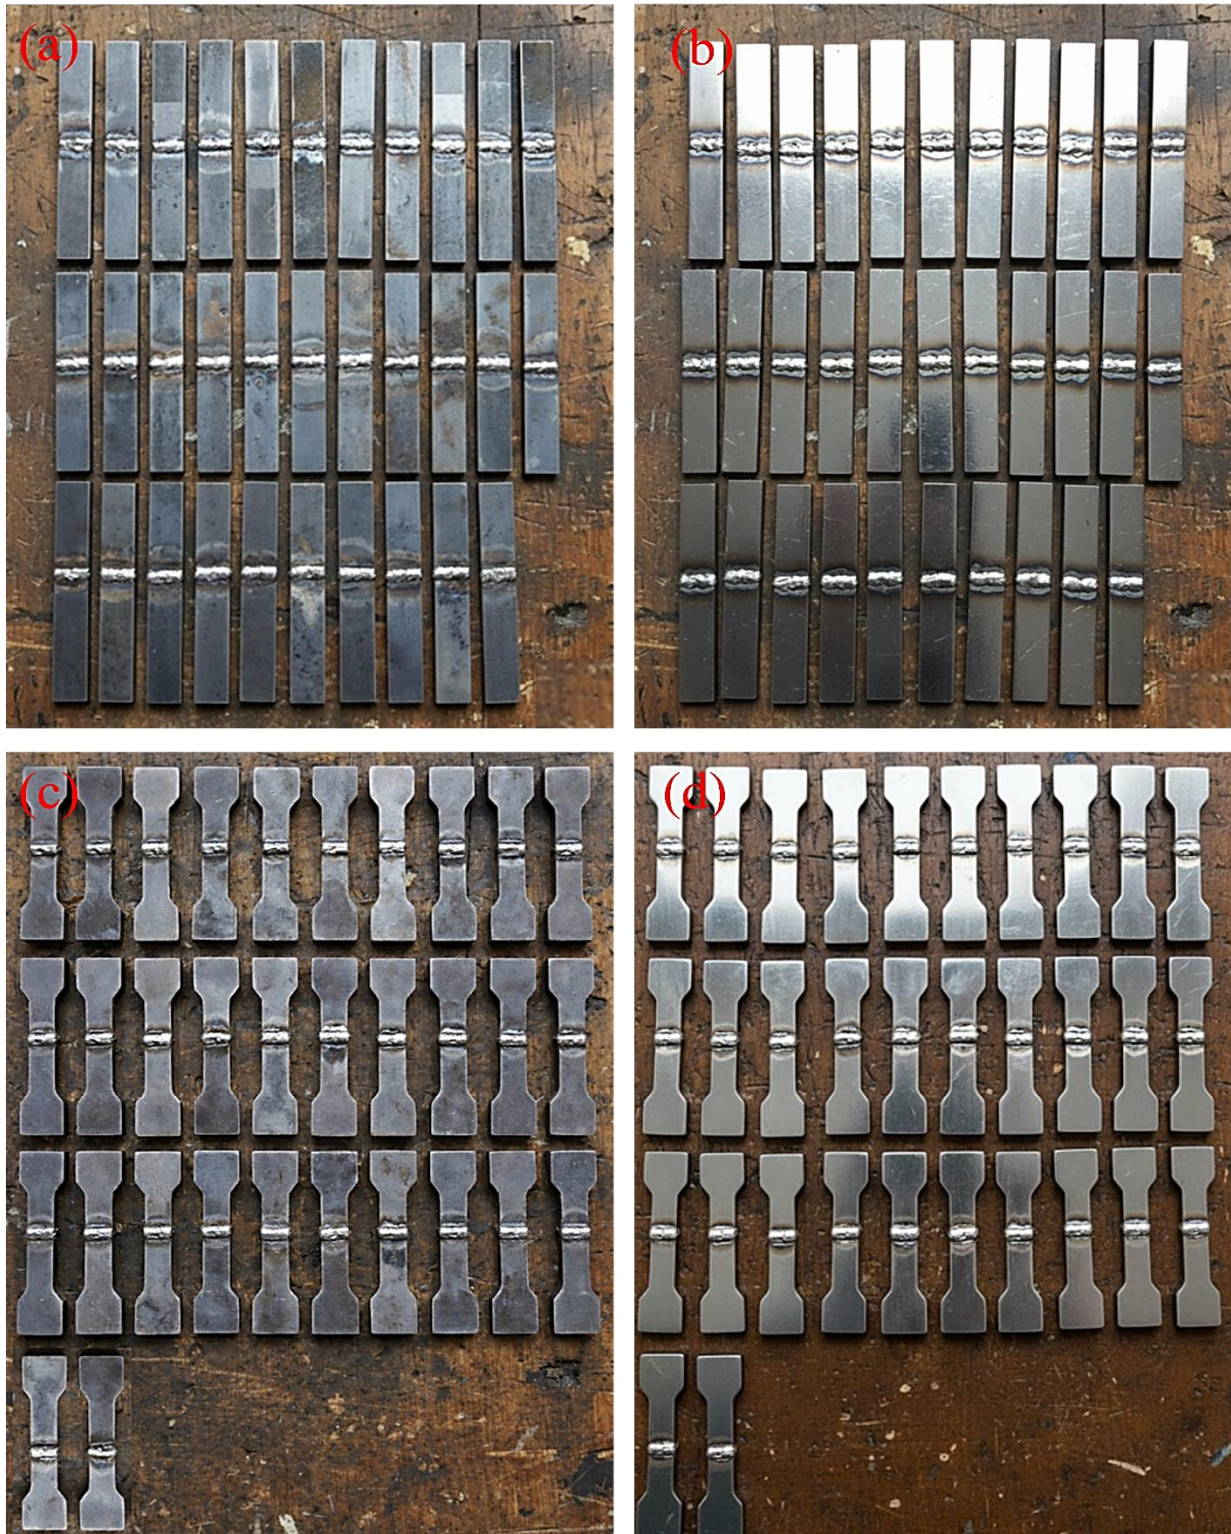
1 Prepared MIG-welded low-carbon steel samples for testing: (a) original 32 welded samples, (b) polished welded samples, (c) dog-bone shaped tensile specimens, and (d) polished dog-bone specimens for tensile testing.
